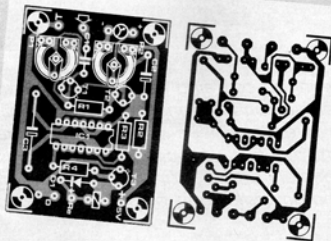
Printed circuit board and component layout for the auto slide changer (EPS 9743).
